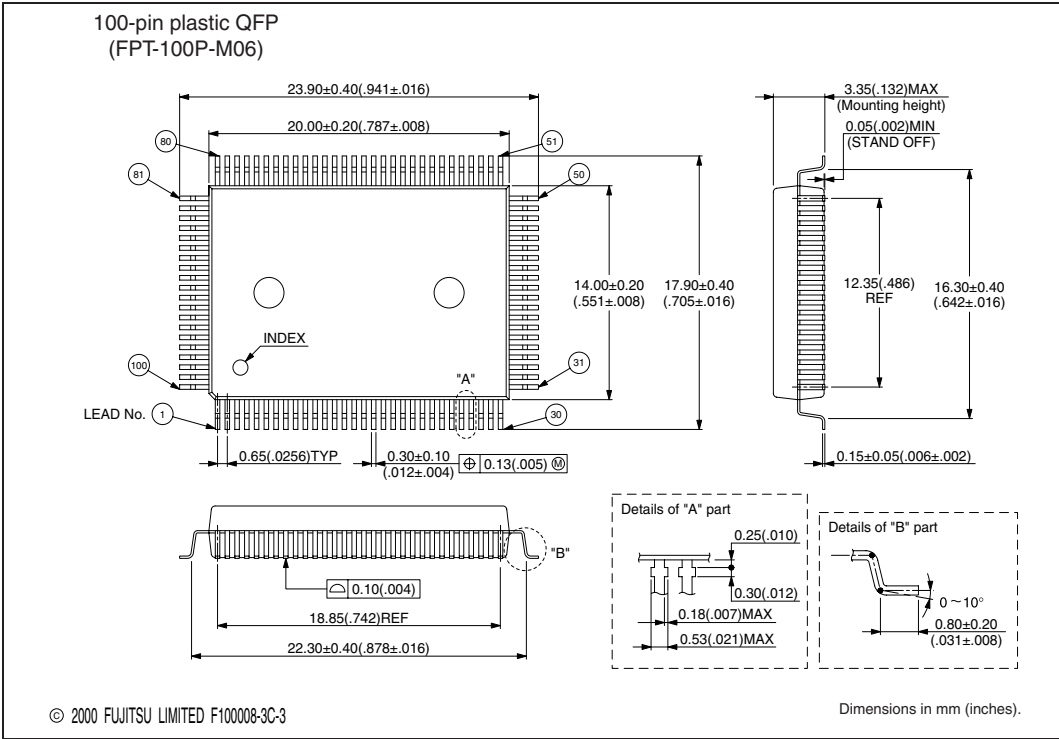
"Package Dimensions" shows the package dimensions of the MB90590 series.
